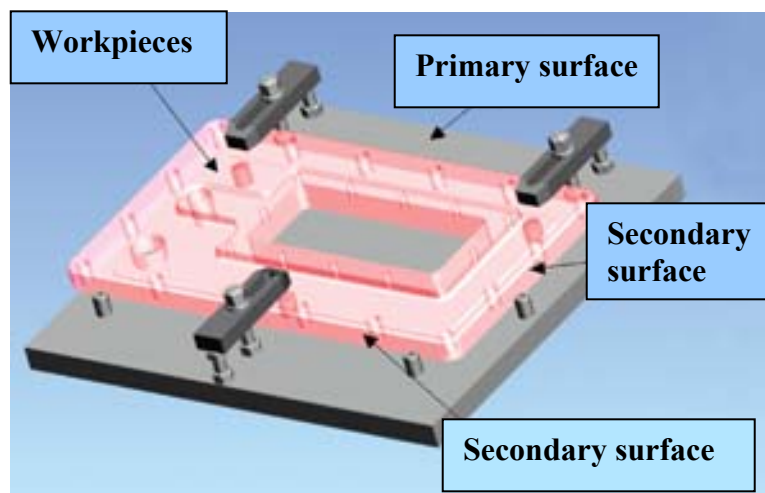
A workholding with six contact points arranged as shown is the most efficient method for flat, rigid workpieces
